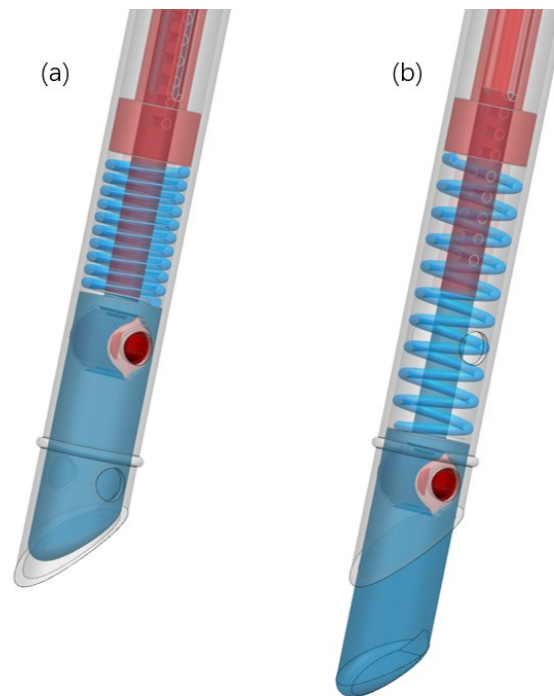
Schematic drawings of penetration-disable mechanism [6]
